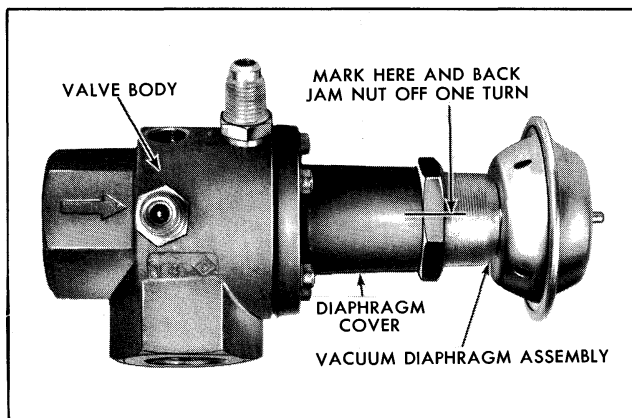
Suction Throttling Valve Marked for Disassembly
